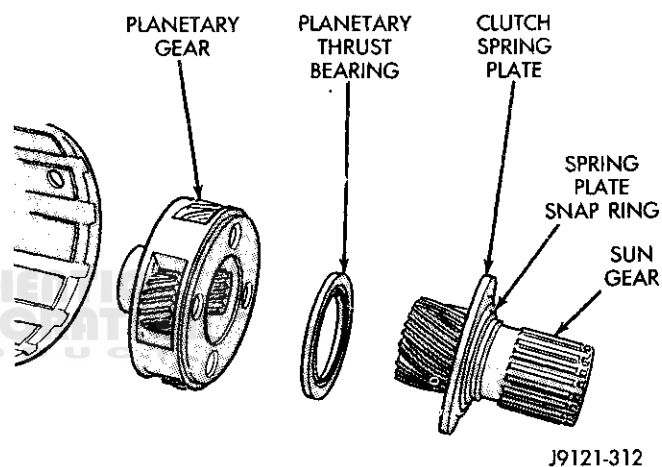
Removing Sun Gear/Thrust Bearing/Planetary Gear
